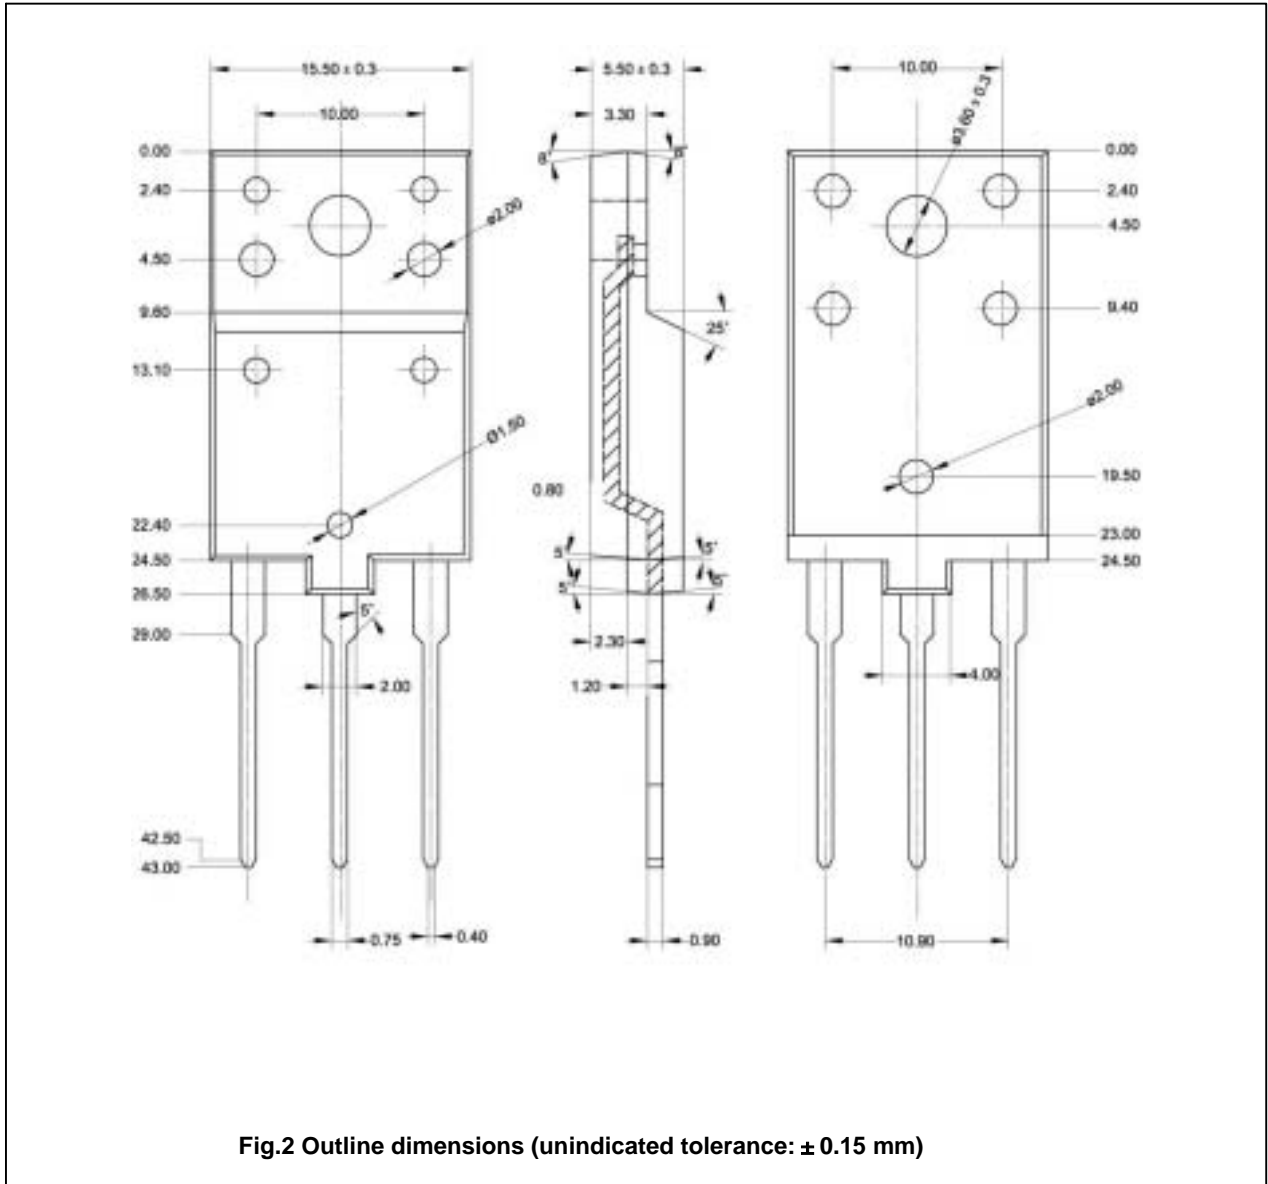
Outline dimensions (unindicated tolerance: ± 0.15 mm)
